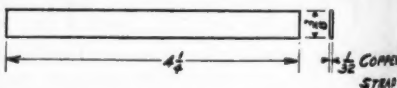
Example of work for which the die shown in Fig. 5 is used.
